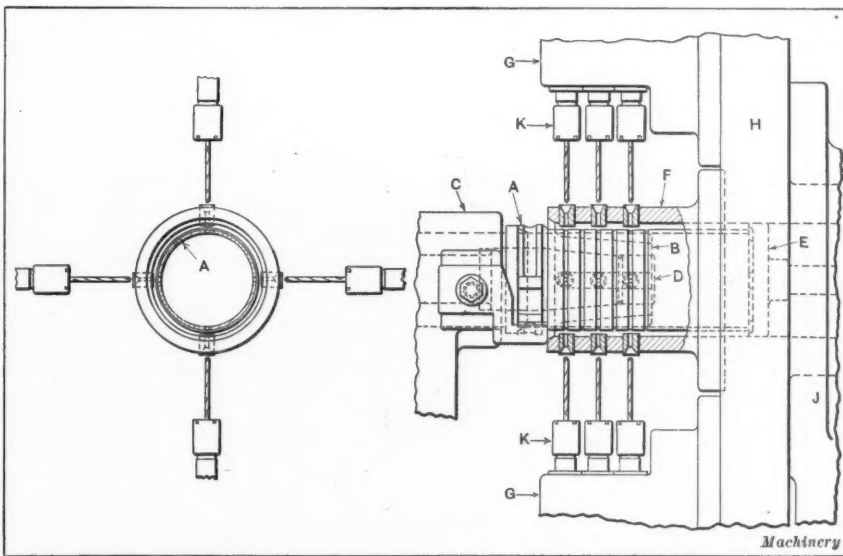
Section through Drill Jig showing Arrangement of Work-holding Arbor
